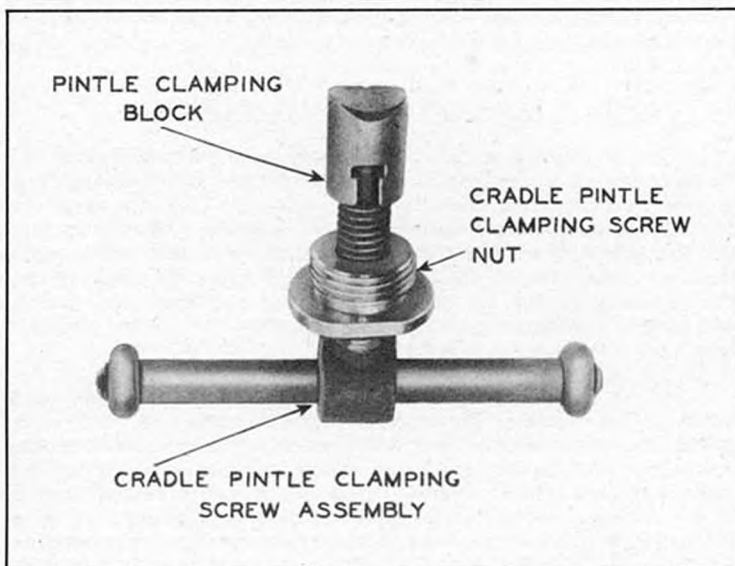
Cradle pintle clamping screw assembly with pintle clamping block attached to it.
